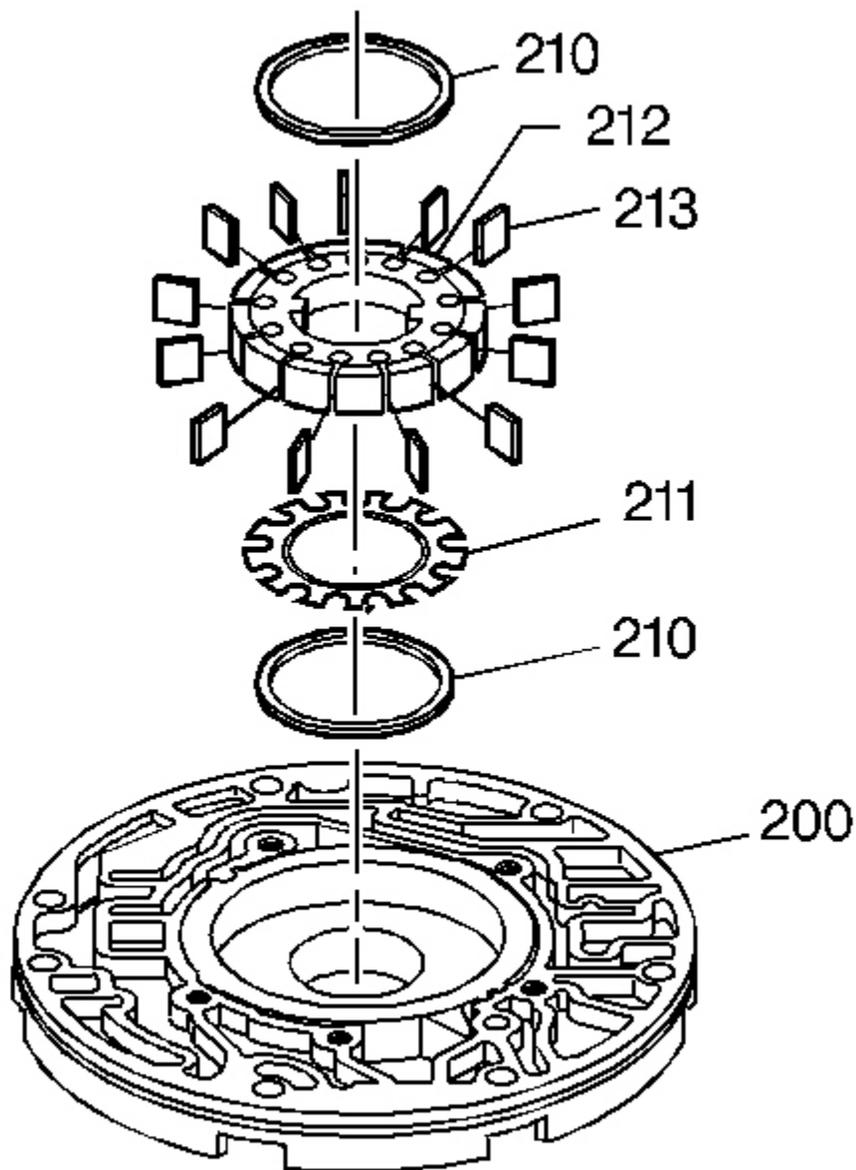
Oil Pump Rotor, Pump Vane Rings, Pump Vanes & Rotor Guide
